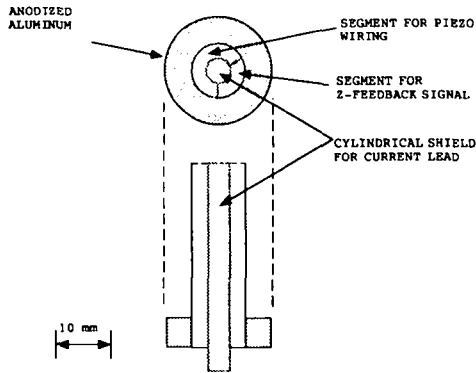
Anodized aluminum insert. Bottom and side view.
